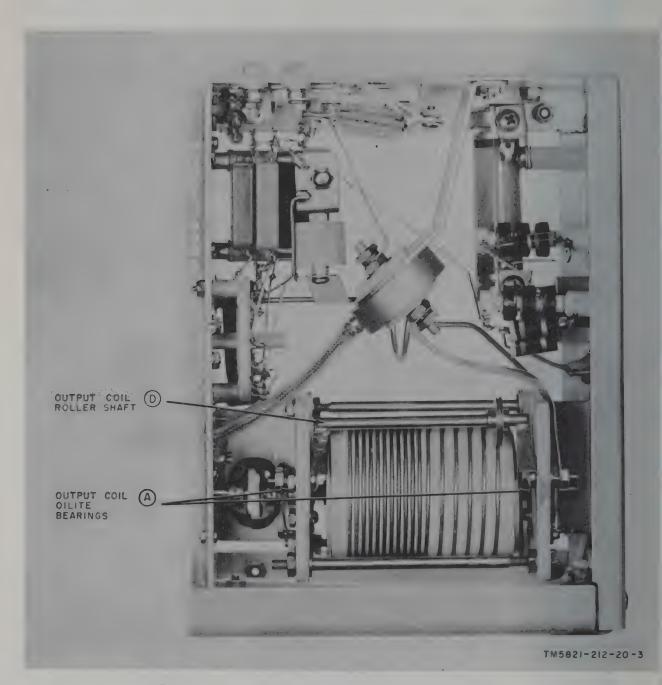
Driver chassis output tank coil assembly, lubrication points.
